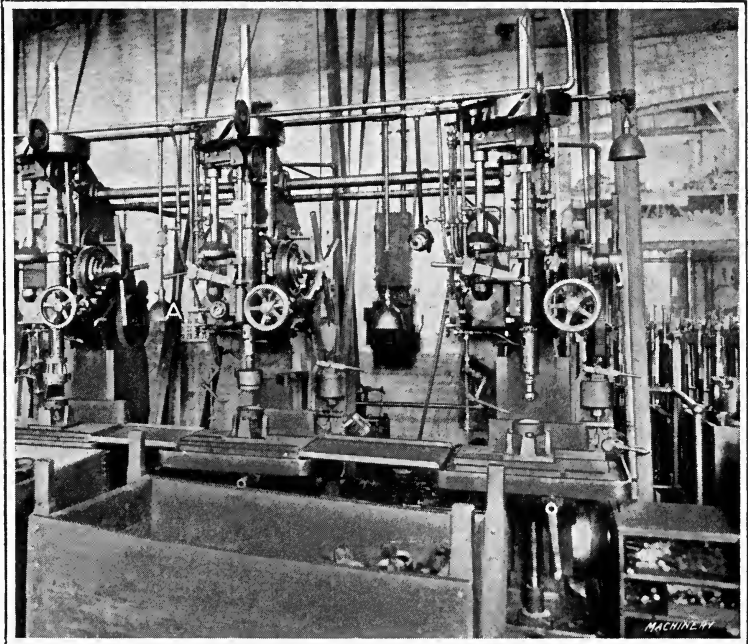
Arrangement of Compressed-air Control for Spindle Reverse Mechanism for Threading and Tapping
